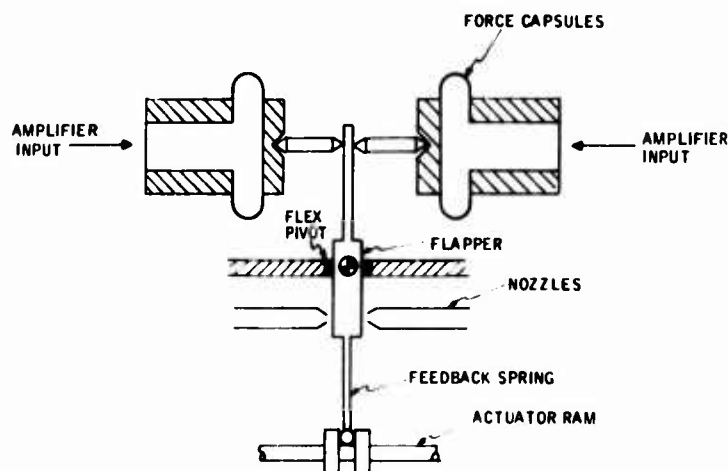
Spool Valve Servoactuator Feedback Techniques -- Feedback Spring Located Below Flapper.
